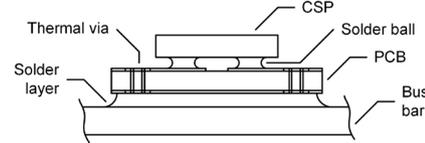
Cross section of the CSP mounted on a PCB using the battery busbar for improved heat dissipation
